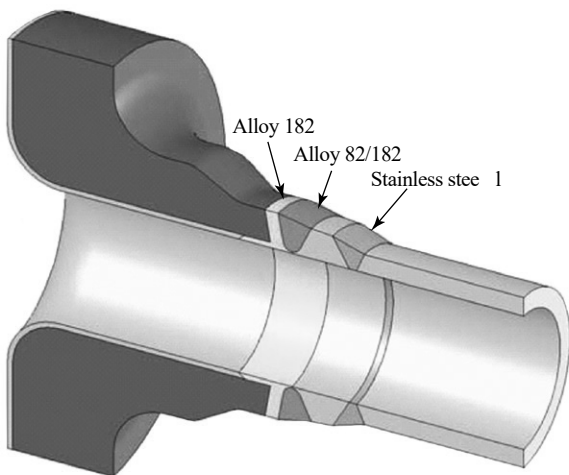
Nozzle-to-safe end dissimilar metal weld. Buttering (shown in yellow) is nickel alloy 182. Weld material (shown in red) is nickel alloy 82/182 weld electrode. Inspection of these welds is done from the inside of the nozzle using phased arrays in the refracted L-wave mode.
